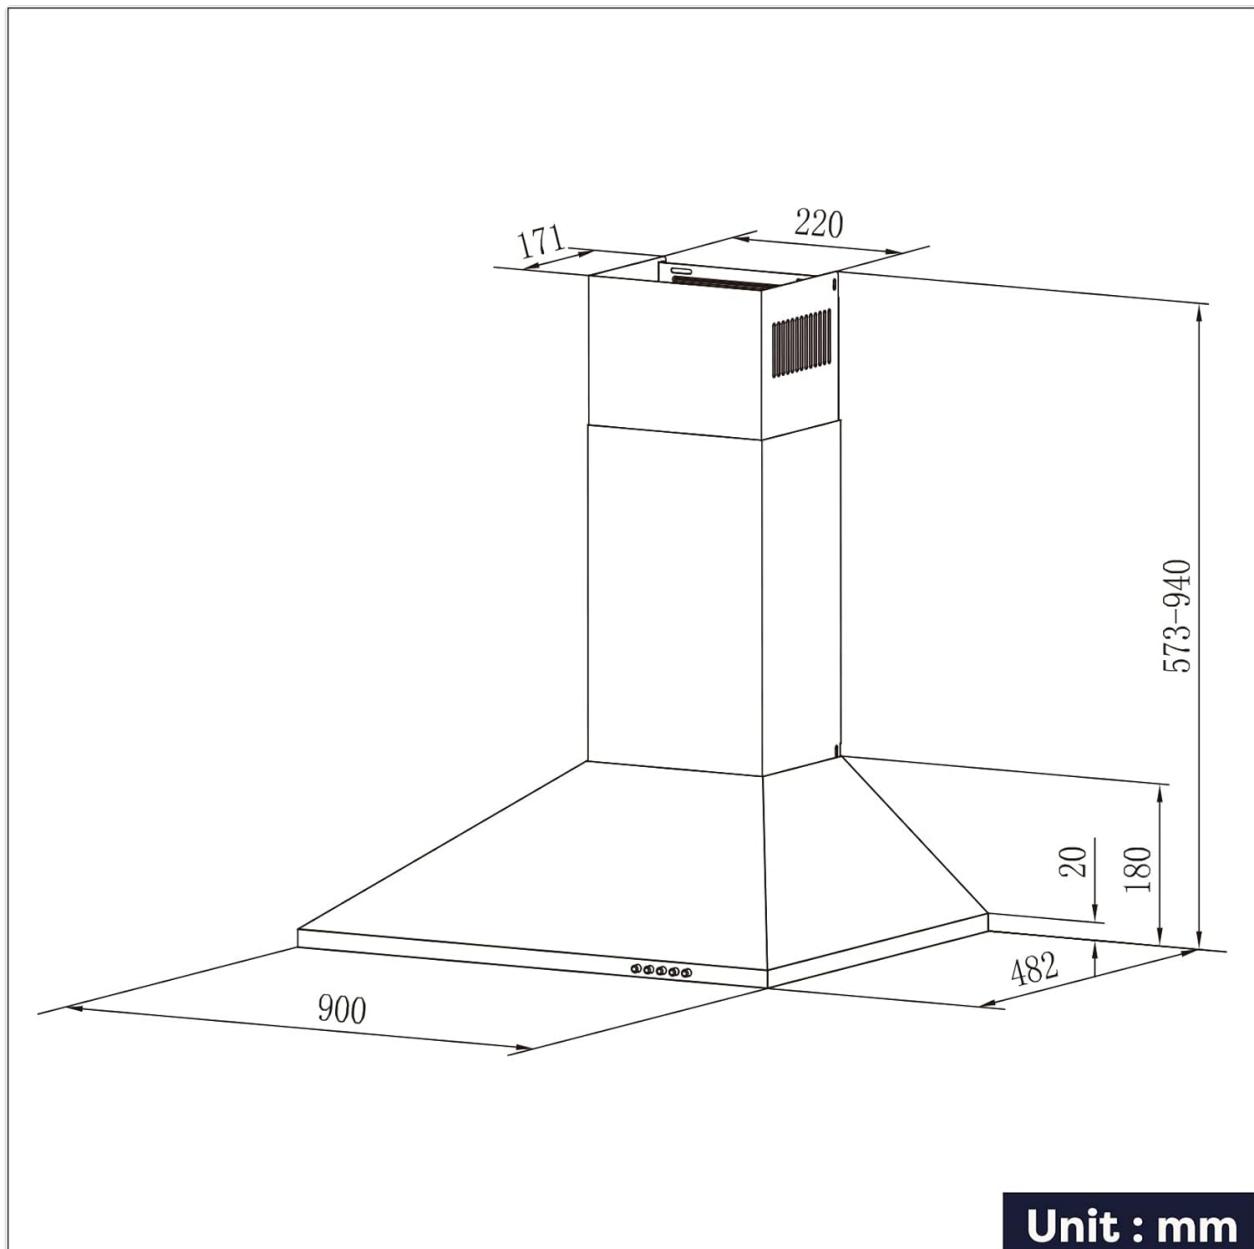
Dimensional drawing of the CAS9201A hood (Unit: mm).
